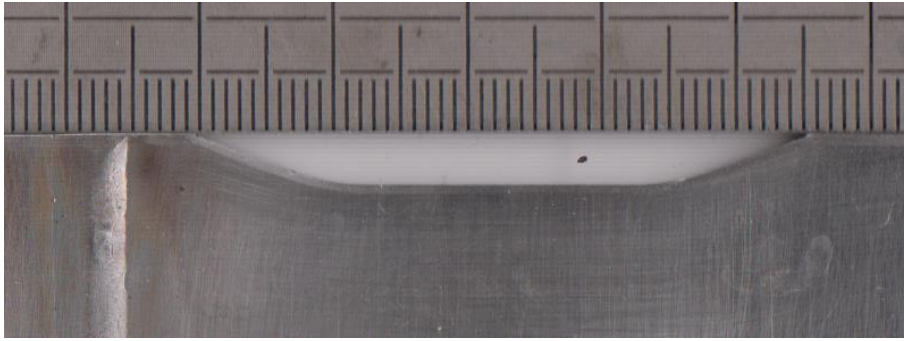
1.7mm profile with standard weld relief-cut
